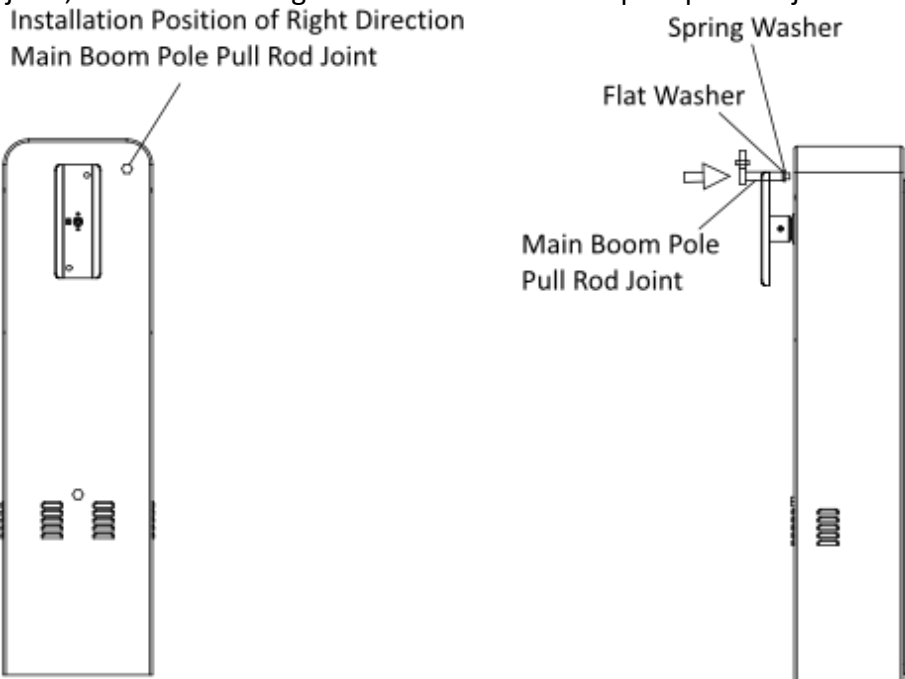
Install Main Boom Pole Pull Rod Joint
